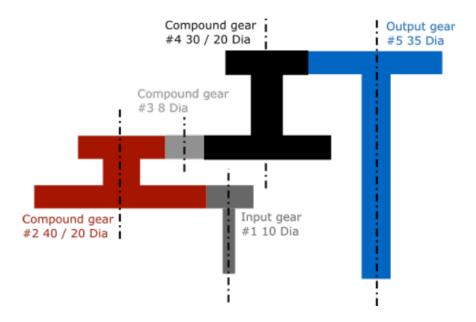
Cross-sectional view of a gear train, with the diameter listed in millimeters for each gear or compound gear (input / output)
